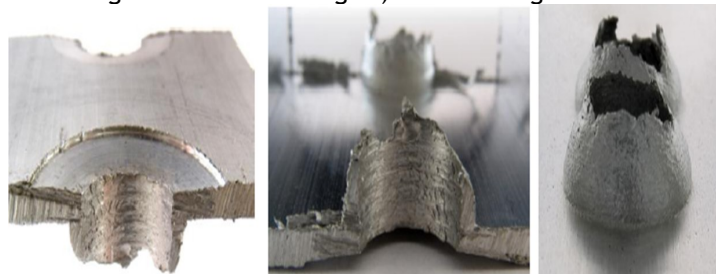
a) Al bushing without collar. b) Low spindle speed, dandruffs. c) Al bushings
